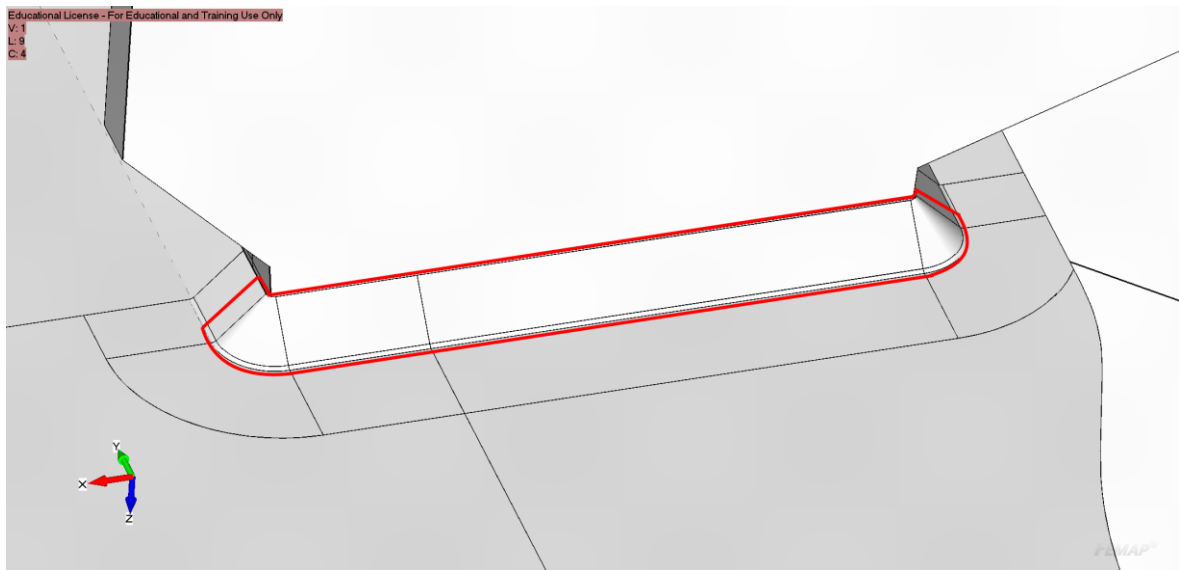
Measuring area of weld's true 3D geometry.
